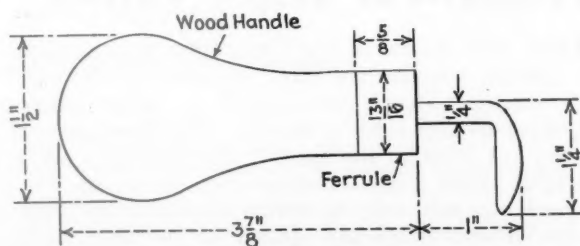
A tool for cleaning gasket grooves in air-hose couplings
